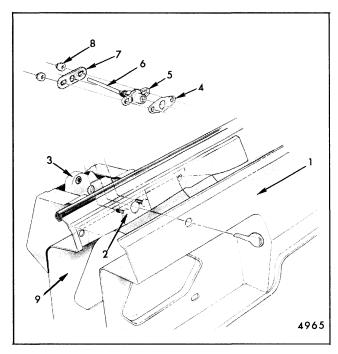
Rear Compartment Lock Cylinder - Pontiac "F" Styles
